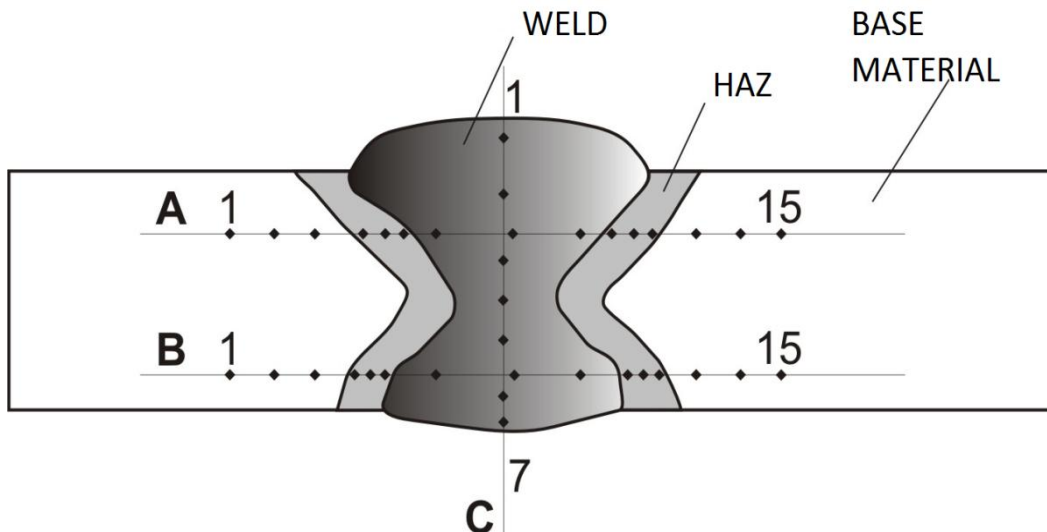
The diagram showing the locations of different hardness testing carried out on welded joints from S700 MC Steel
